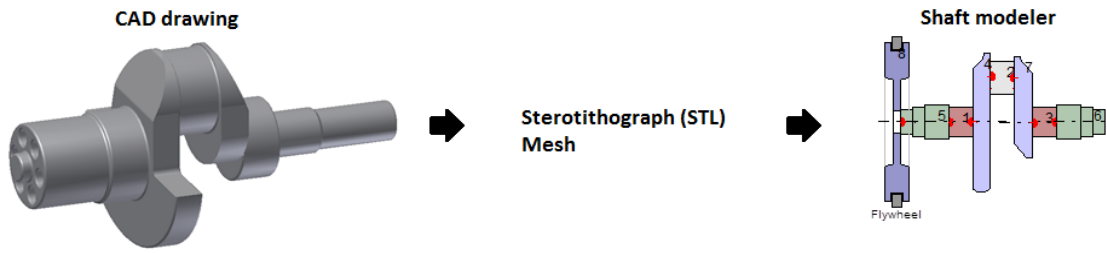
CAD drawing of crankshaft and shaft modeler 2-D representation
